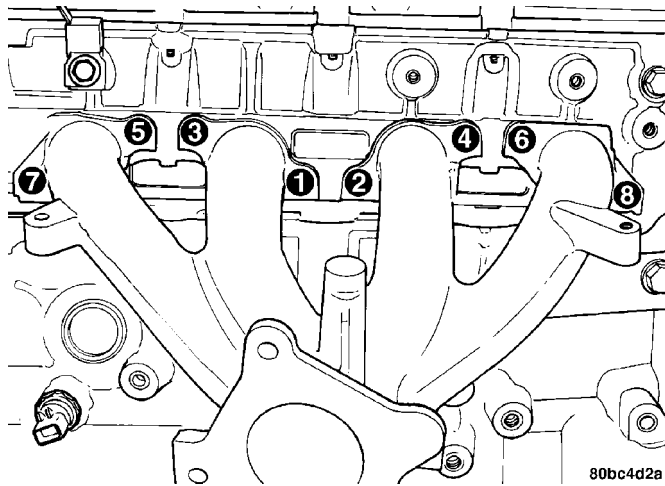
Exhaust Manifold Tightening Sequence - Typical
